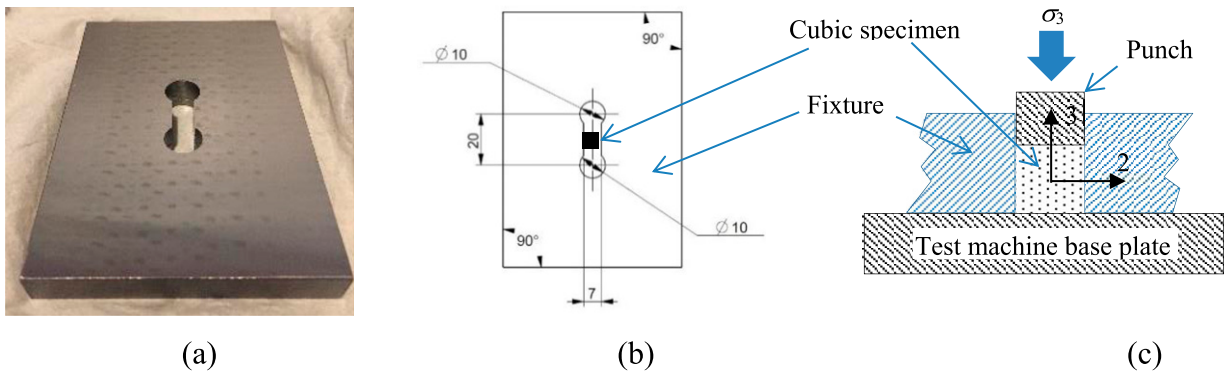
(a) Steel fixture, (b) top view of the fixture with a specimen as indicated, and (c) a section view of the test arrangement where fibres in the specimen are orientated out of the page.
